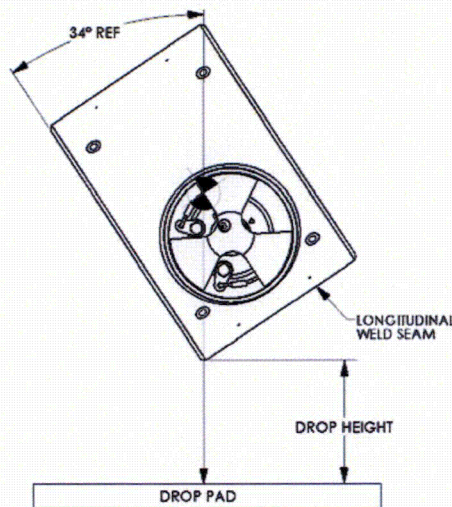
9 m (30 ft) First Drop Orientation TP180C – Corner Package Weld Seam Hit
